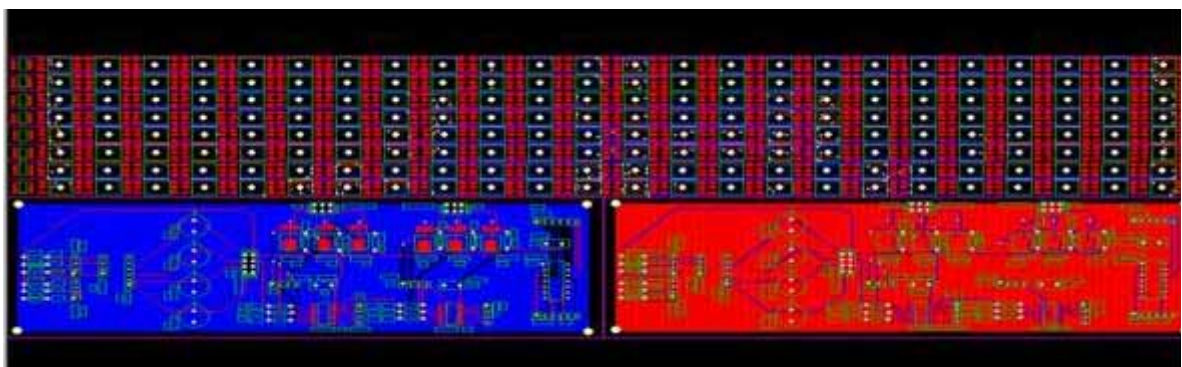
The PCB layout consists of eight strips of LED light-bar (upper), and two LED driver boards (bottom).
